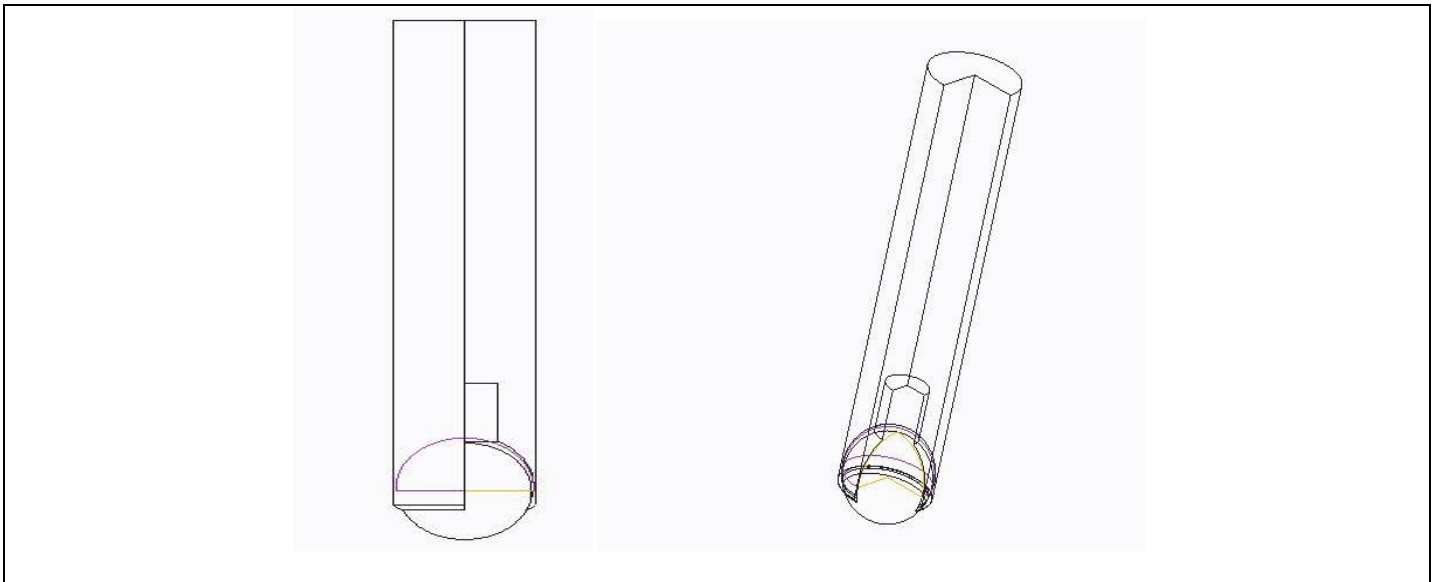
Cut Section of Ball Pen type Follower with lubricating oil groove
